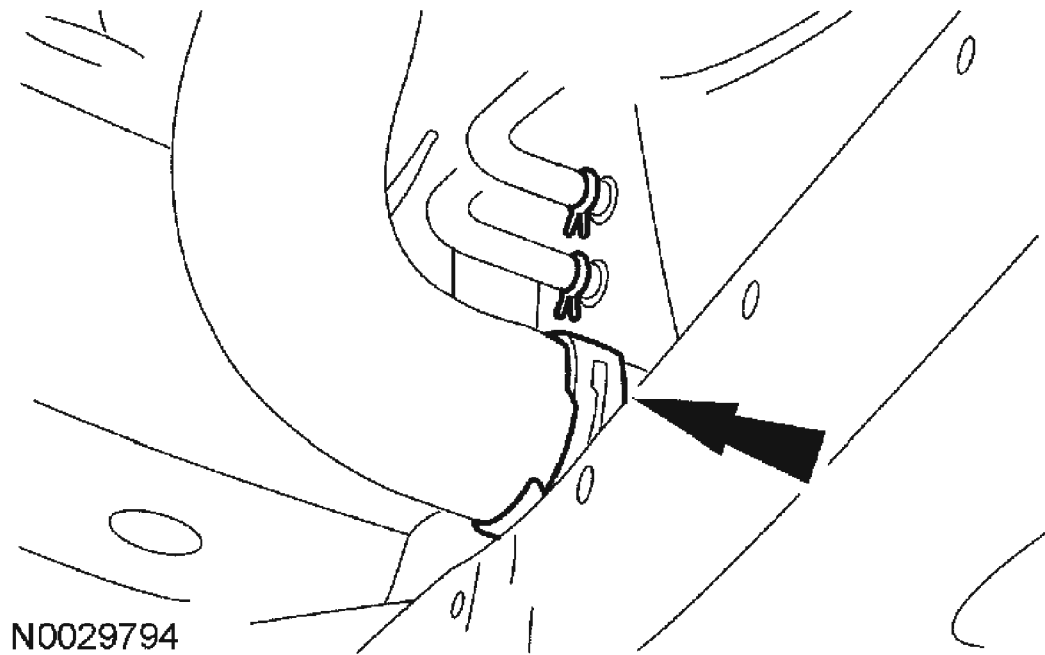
Removing Shift Cable And Bracket And Position It Aside
